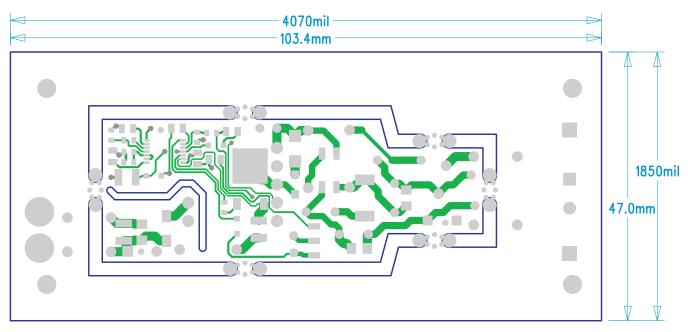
LM3447-A19-230VEVM Bottom Layer Copper (bottom view)
